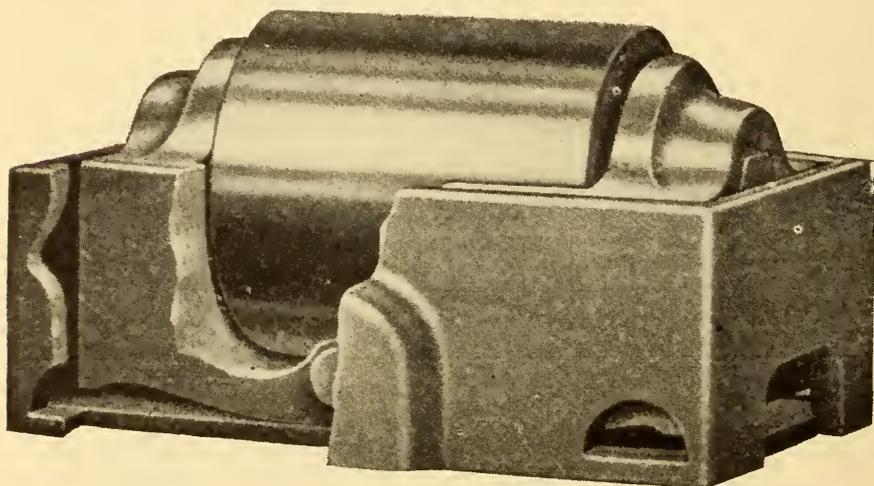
Woods X L Side Bearing. Designed for Attachment to Truck Bolster.
